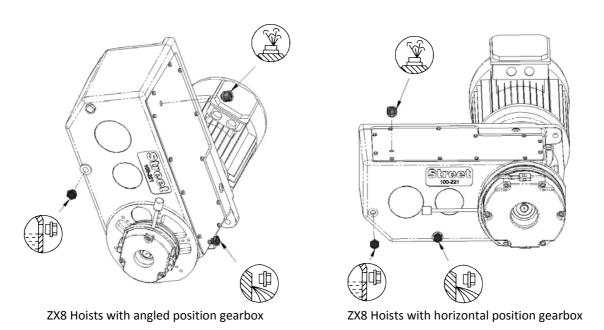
ZX8 Gearbox oil fill & level plug locations
